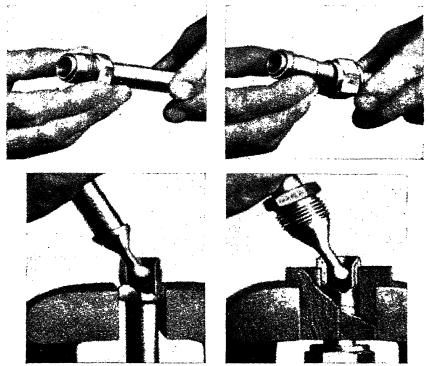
Ball-type flaring tool. (Courtesy of Parker Appliance Co.)
